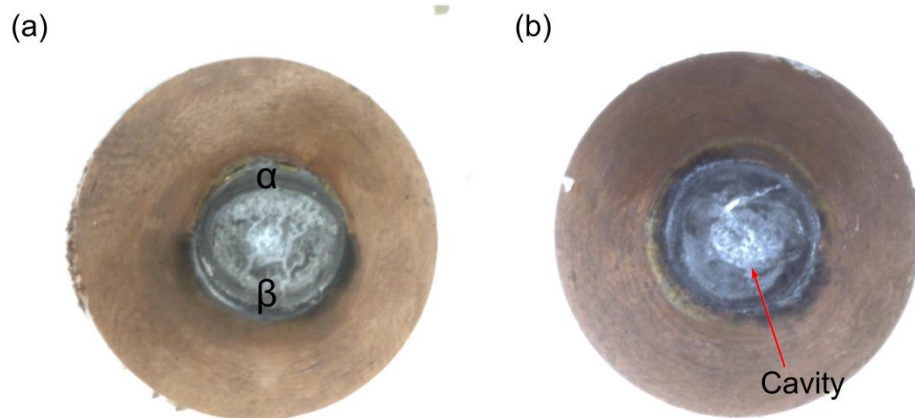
Top views of worn GA electrodes. (a) 10 welds. (b) 200 welds
